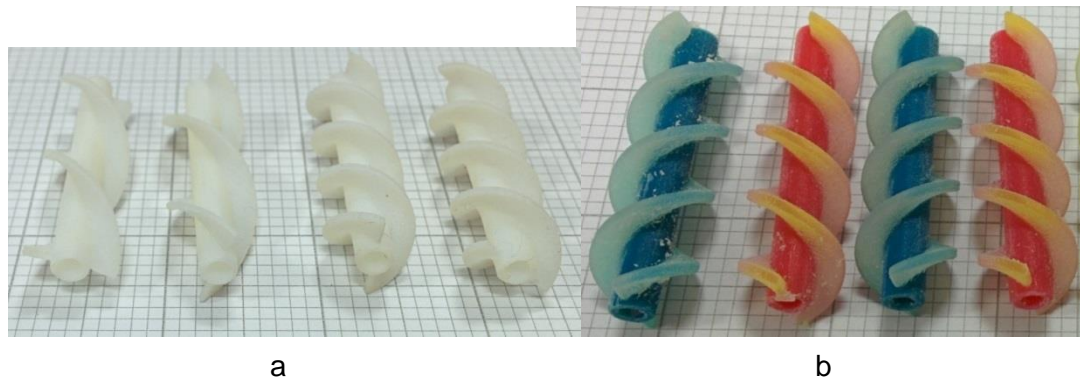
Rapid prototyped screw sections. a) Shown left to right: two rigid single material 40mm pitch screws; two rigid single material 20mm pitch screws. b) Shown left to right: four compliant multi material 20mm pitch screws arranged in two pairs of opposite handed threads. Colours are for identification purposes only.
